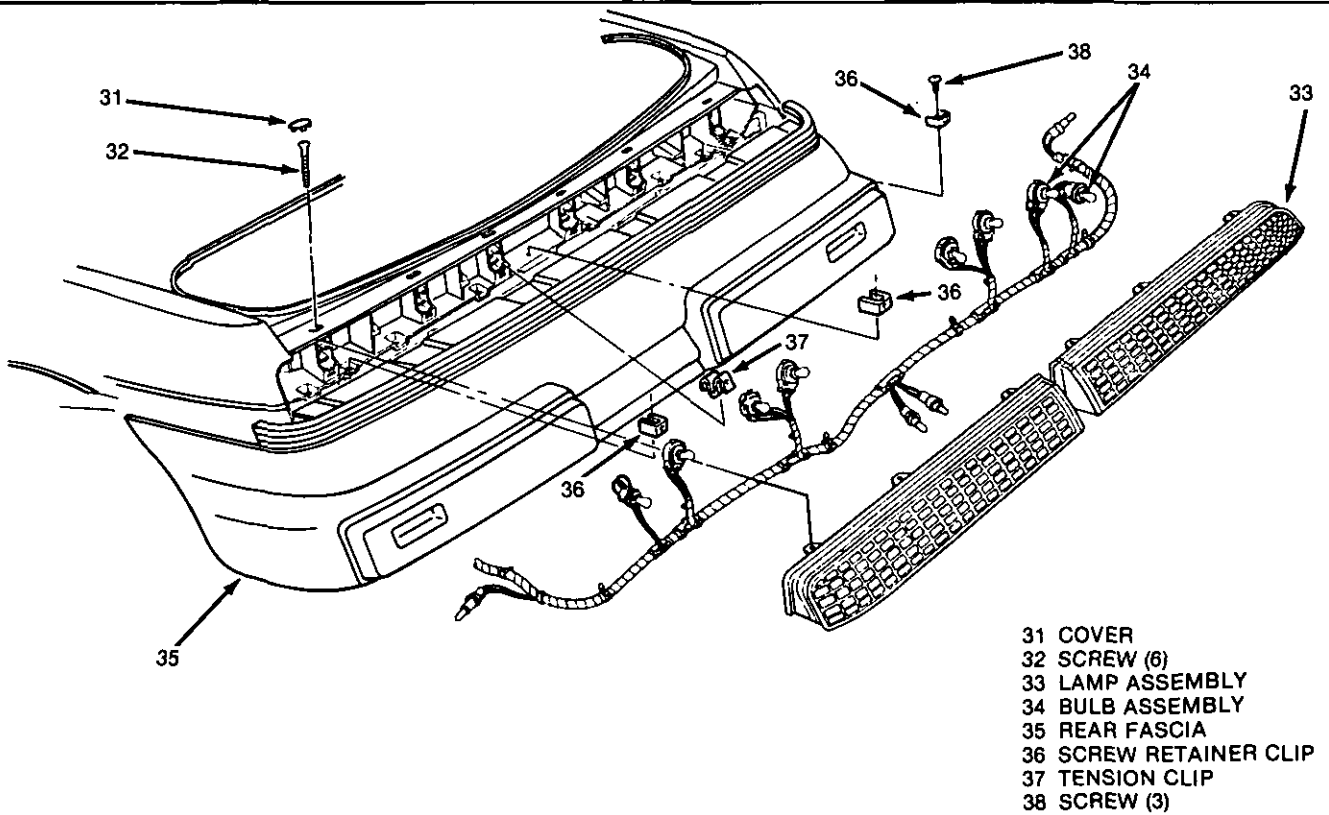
Tail Lamp Assembly - 37 Style Shown, 97 Style Similar
